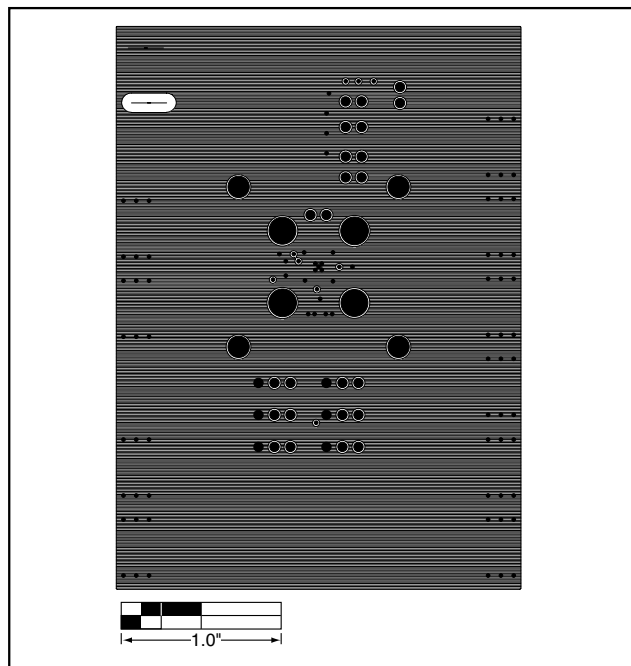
MAX3873A EV Kit PC Board Layout—Ground Plane
